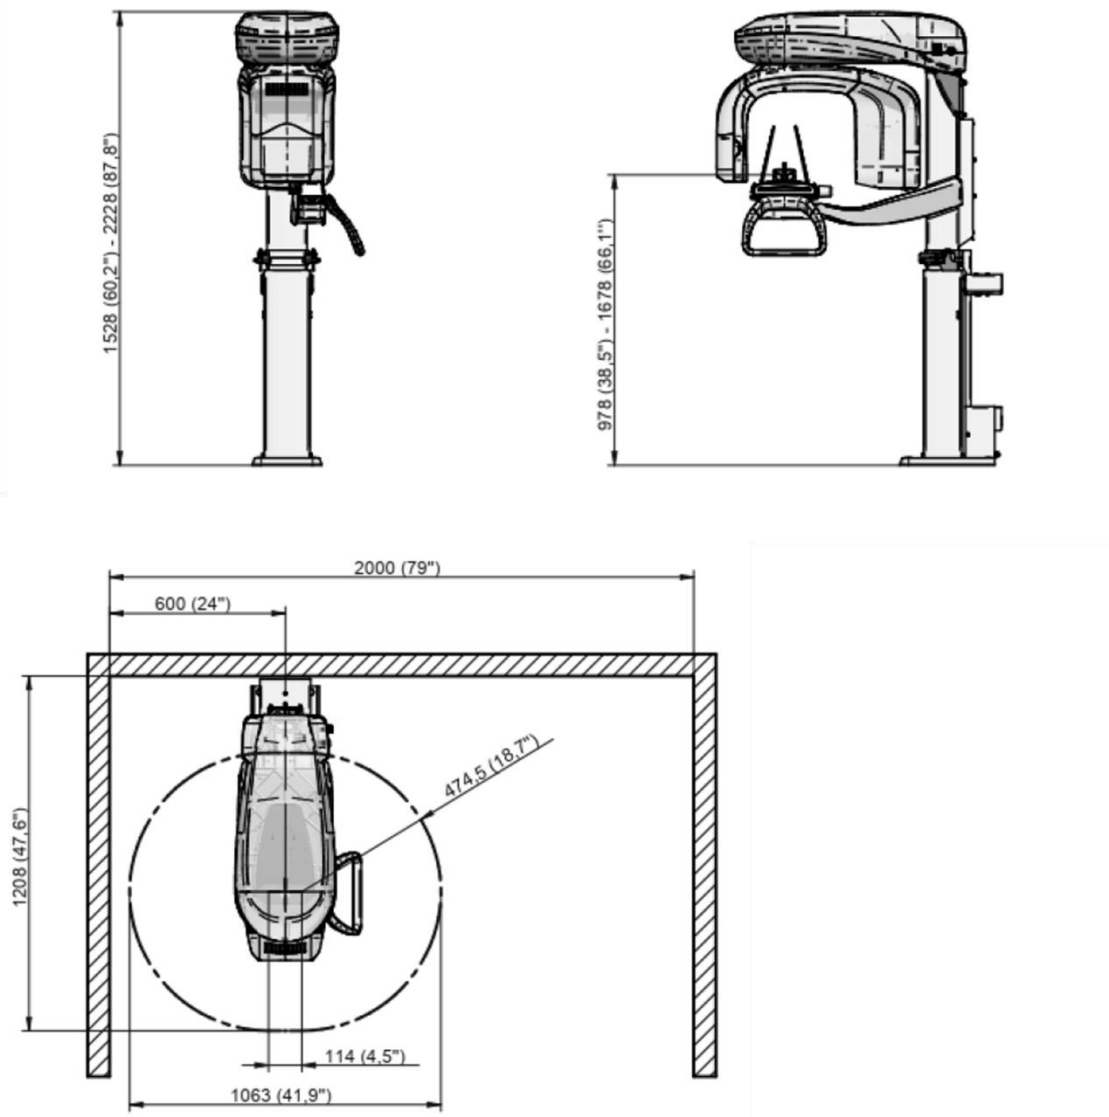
x-mind optima 3D dimensions – Floor mounted version
